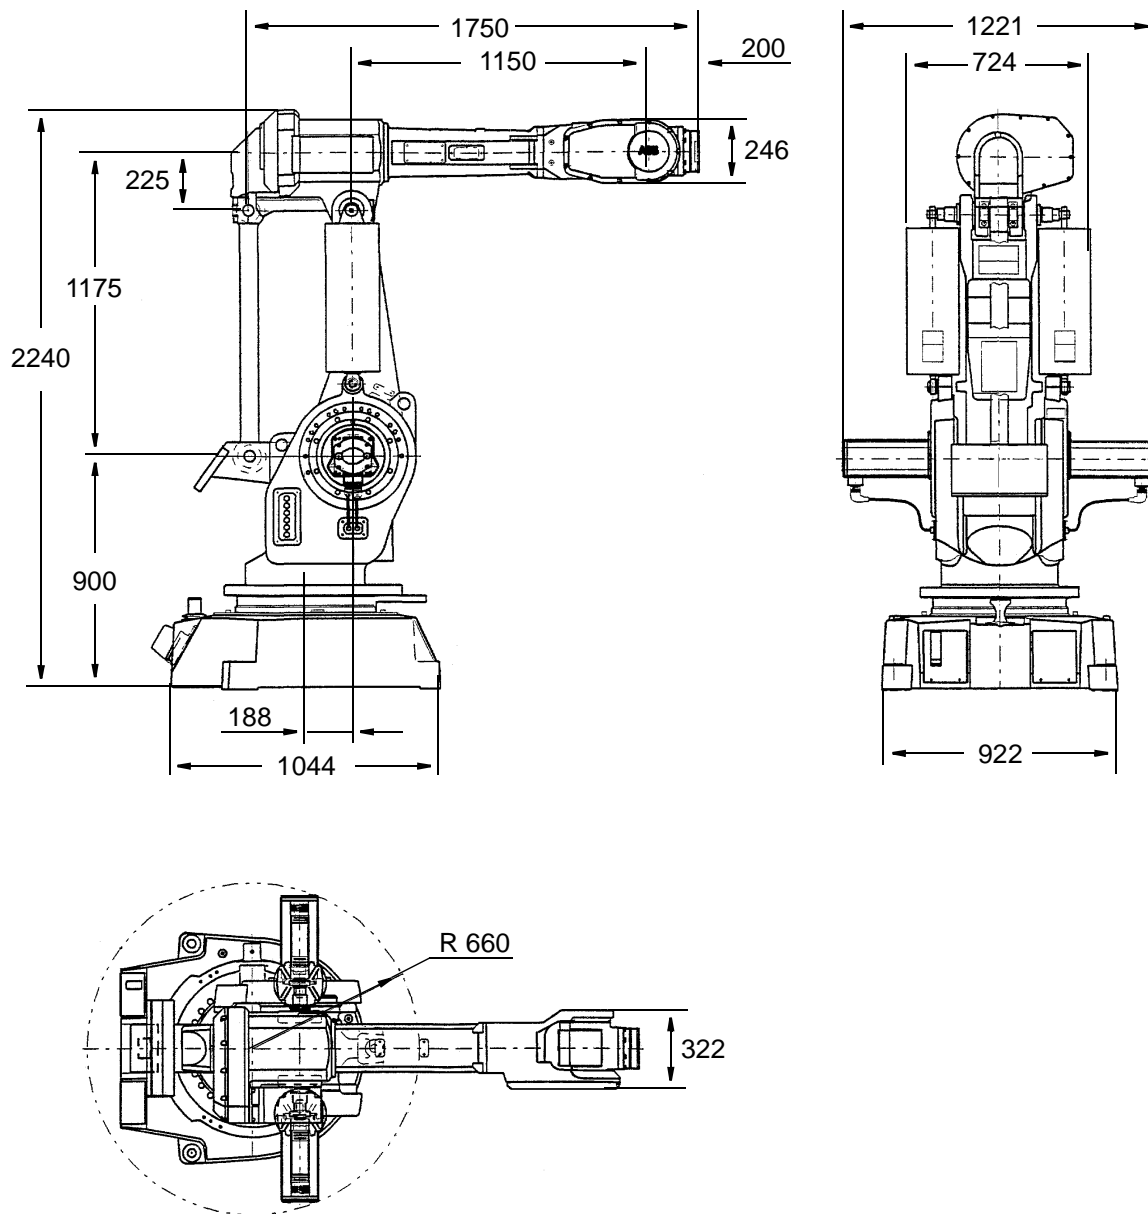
View of the manipulator from the side, rear and above (dimensions in mm).
